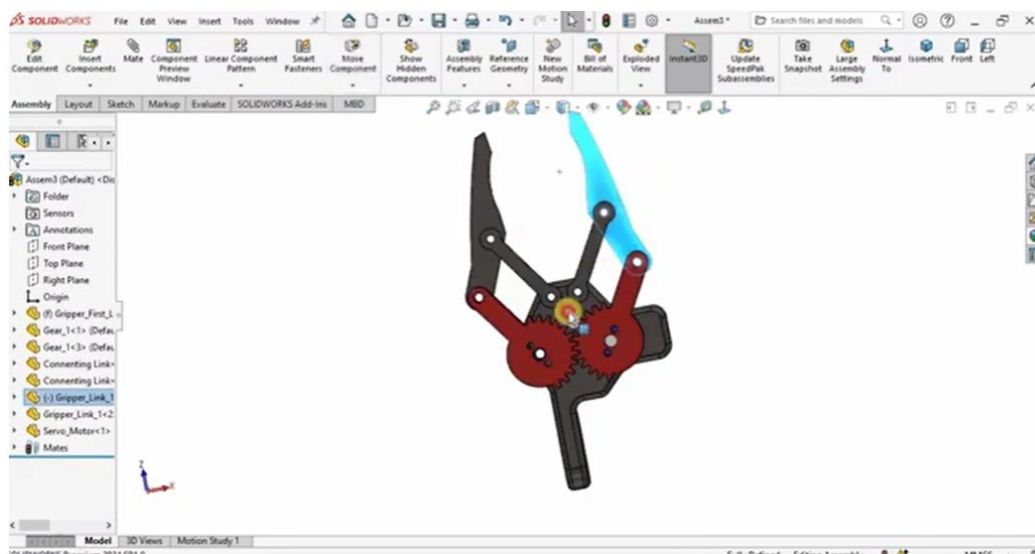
Gripper Sub-Assembly — gear-driven linkage mechanism with servo motor
